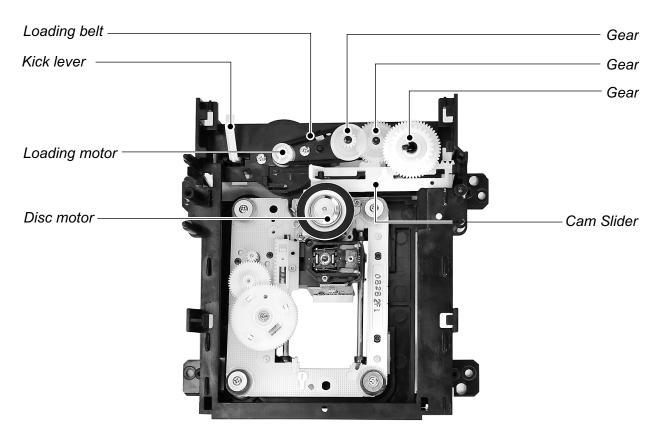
Mechanism chassis assembly (Internal side)
